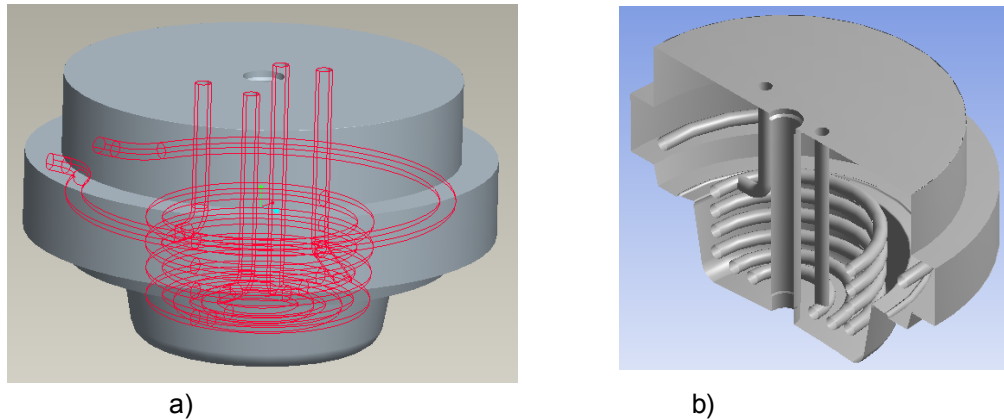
(a) Core and stripper part with conformal cooling channels of circular cross-section (b) Sectional view of the model showing the inside structure.
